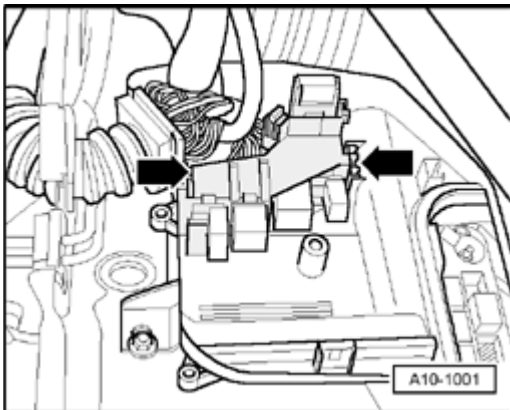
Disengaging Locking Mechanisms And Removing Secondary Relay Carrier In E-Box Toward Top
